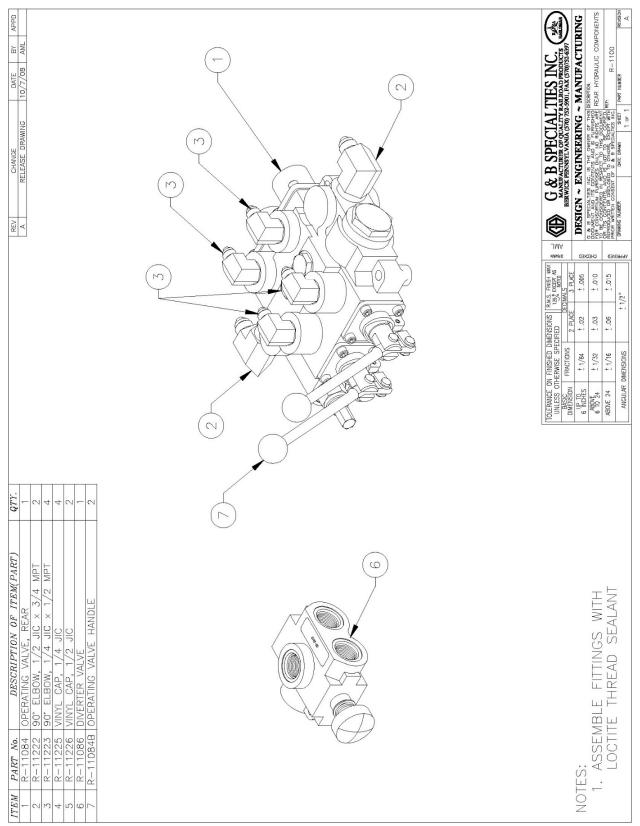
R-11084 (Rear Railgear Hydraulic control Valve Assembly Reference)
